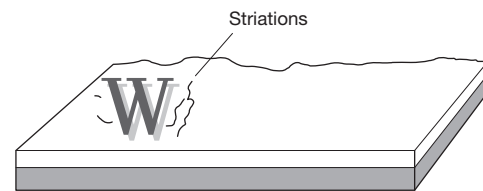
Surface defects on the overlay of an embossed 'W.' These defects may be found on the front and back of the card, either on or near the embossed character, or inside it.
